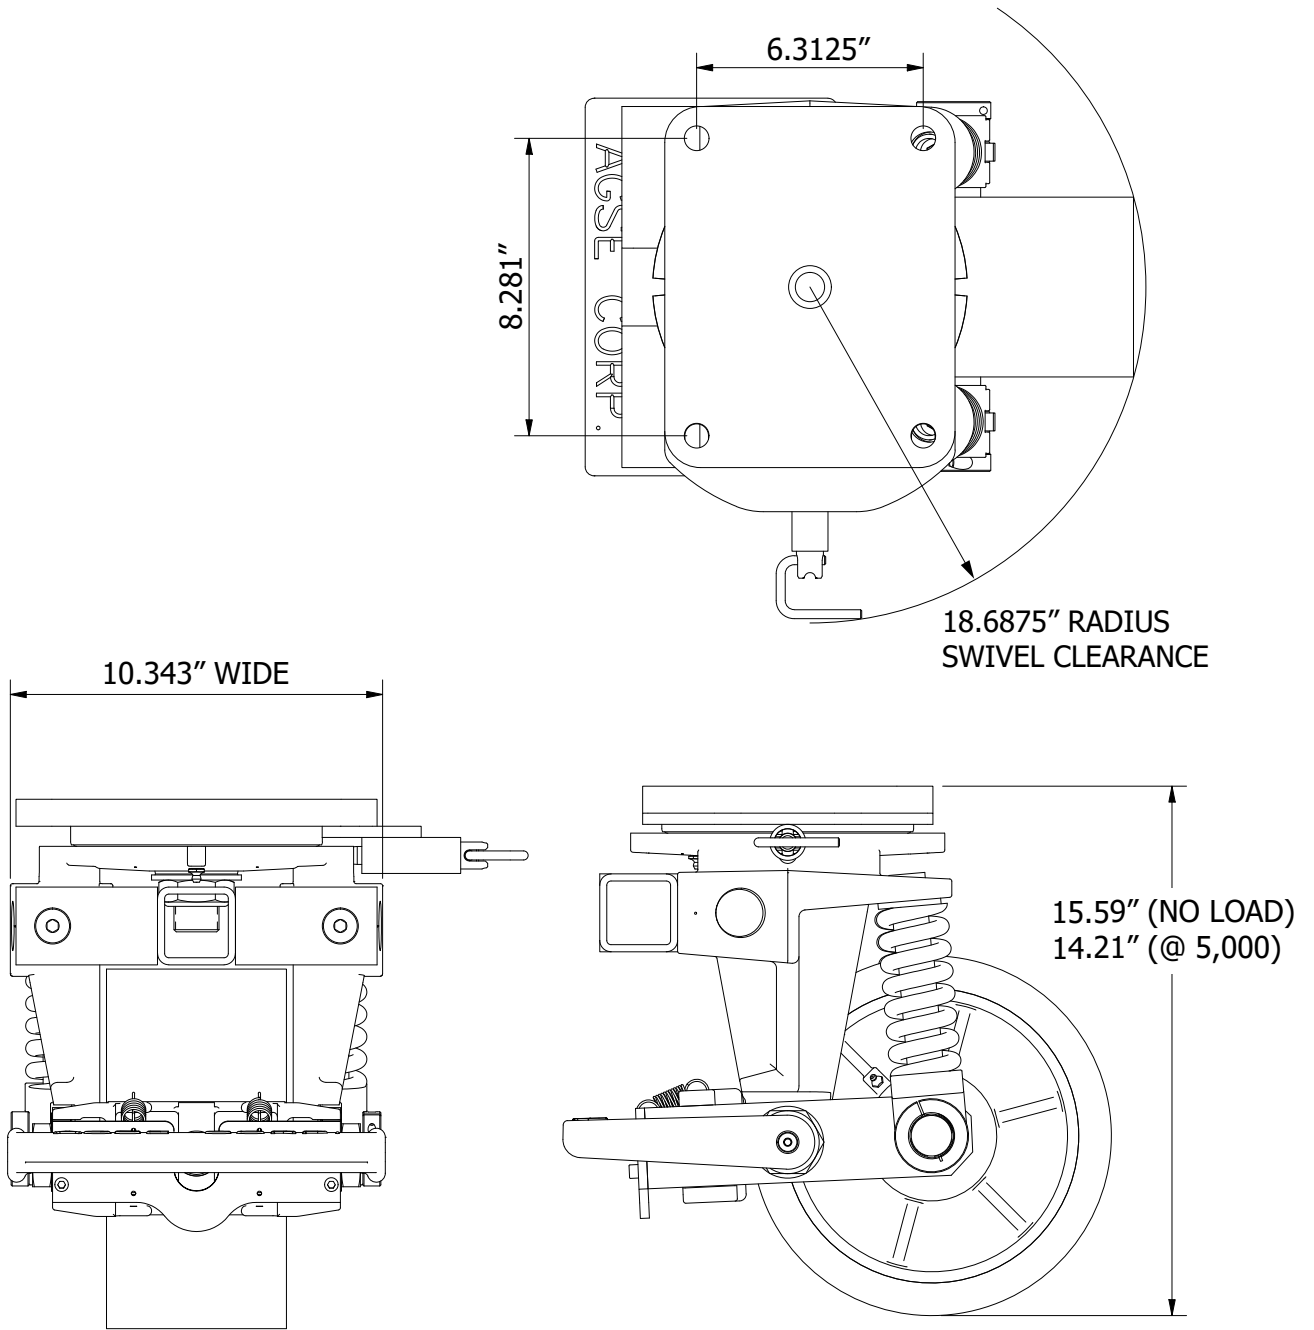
Dimensions and Clearances for AM-2079-13 (5,000 LBS -10" Diameter)
